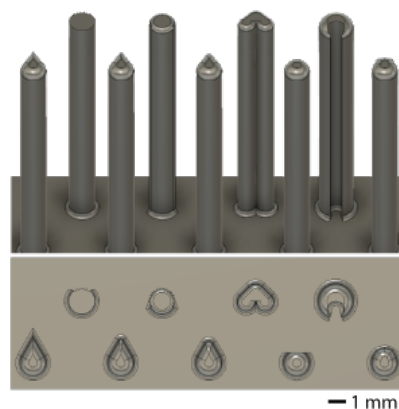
Example CAD model of custom pins printed for surface tension motion programming method.
